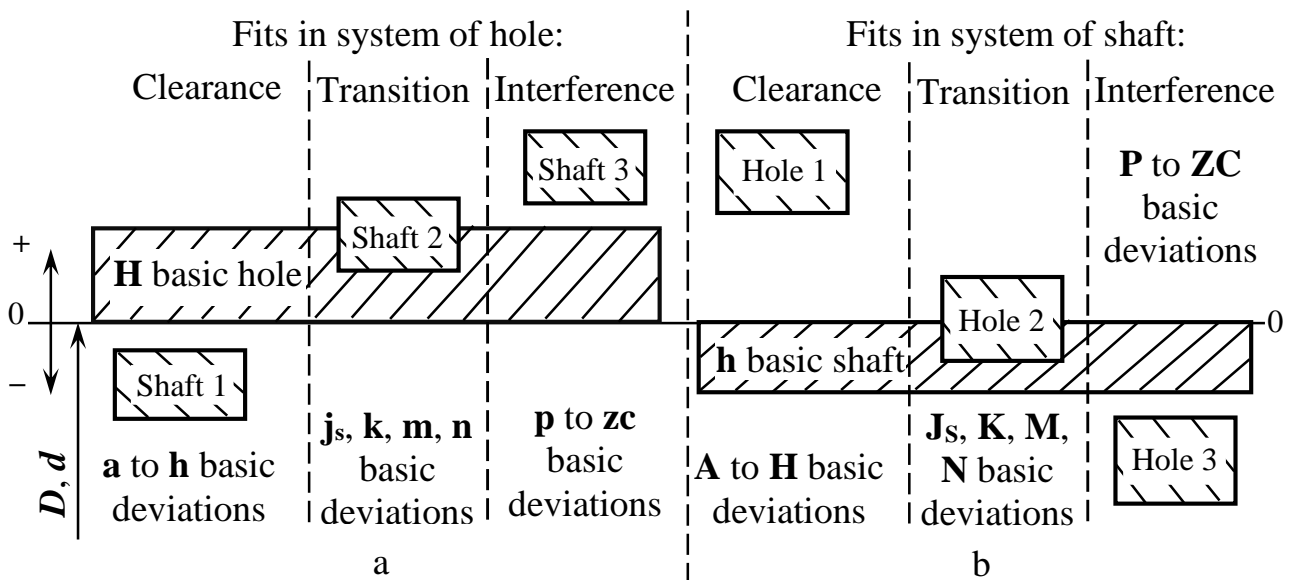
Diagram of positions of tolerance bands in system of hole and system of shaft to create clearance, transition and interference fits: a – fits in system of hole with tolerance bands of representative Shaft 1, Shaft 2 and Shaft 3 respectively according to Fig. 1.2; b – fits in system of shaft with tolerance bands of representative Hole 1, Hole 2 and Hole 3 respectively according to Fig. 1.2
